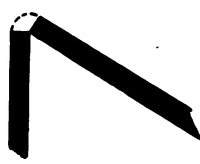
Sharp Corner Weld for Light Sheets
